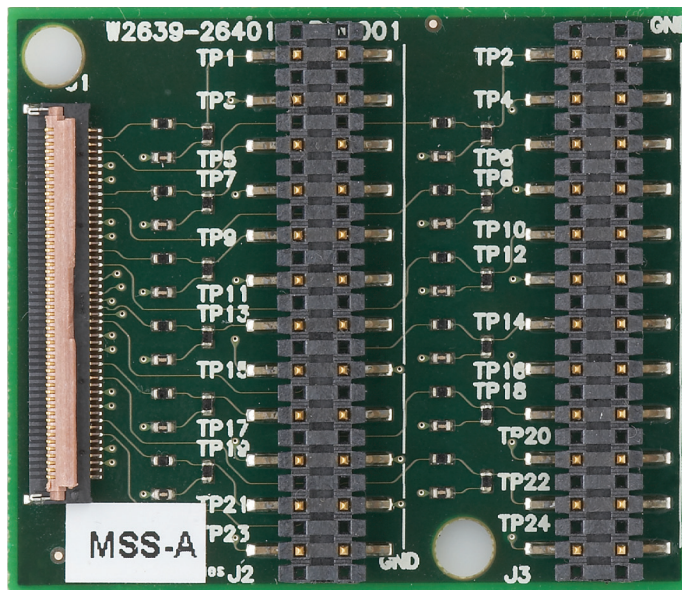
W2639A LPDDR scope probe adapter board with test points for connection to oscilloscope
